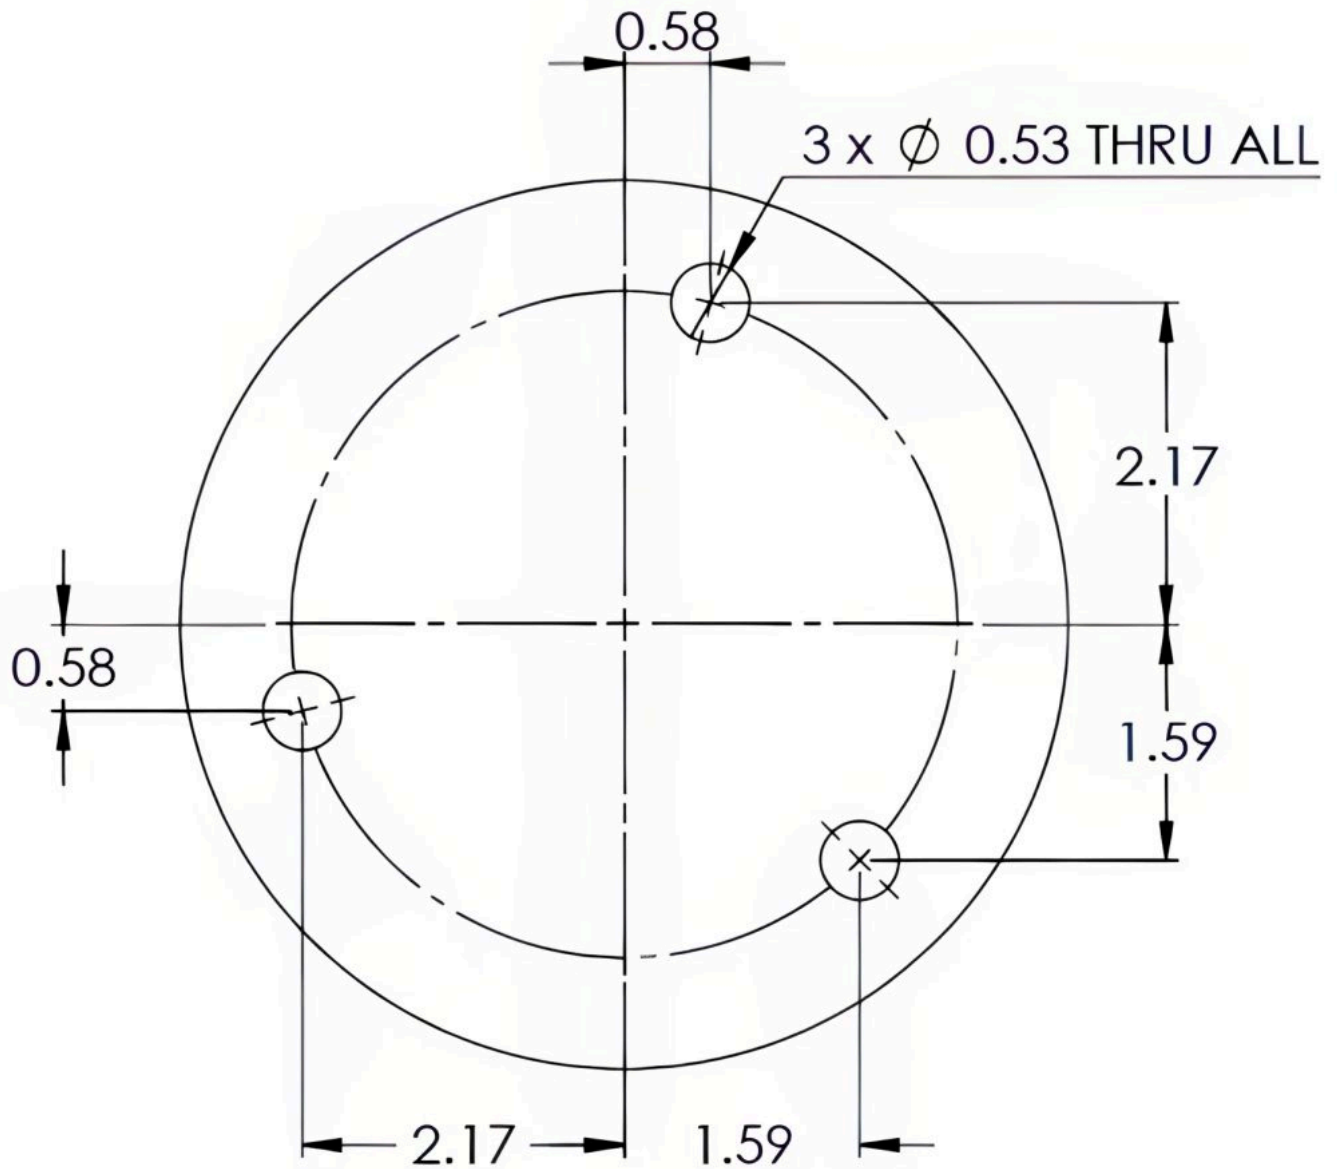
Bolt circle locations are dimensioned using coordinate positions.
